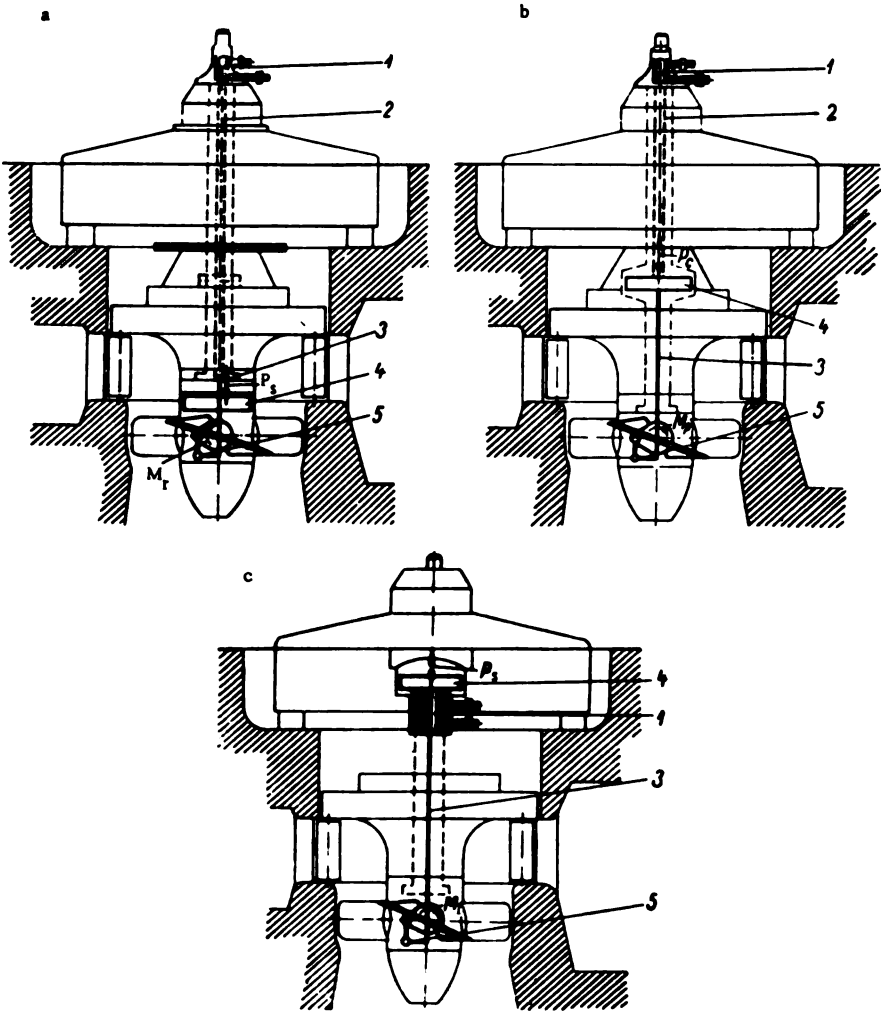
Various layouts of servomotor, oil-supply head, and blade-operating mechanism
